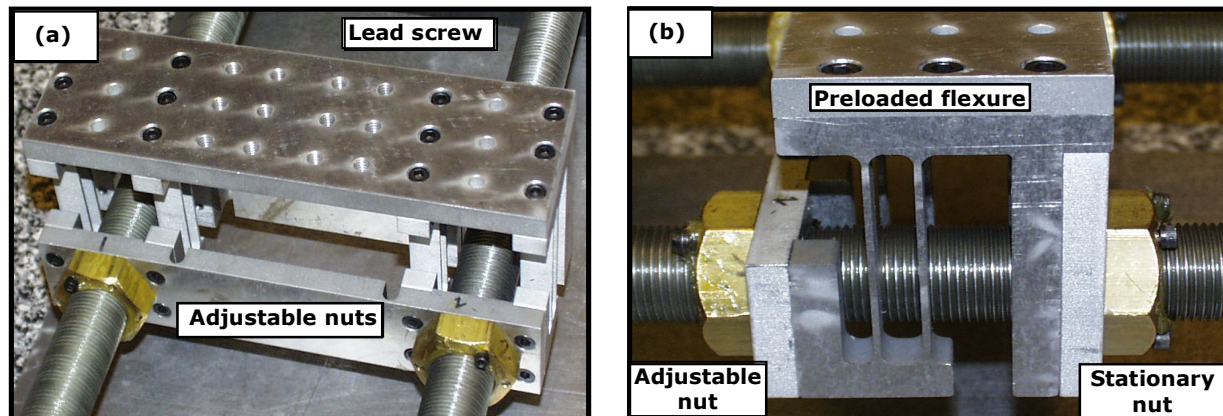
(a) Prototype system built using simple construction materials (b) Nuts preloaded via flexures
